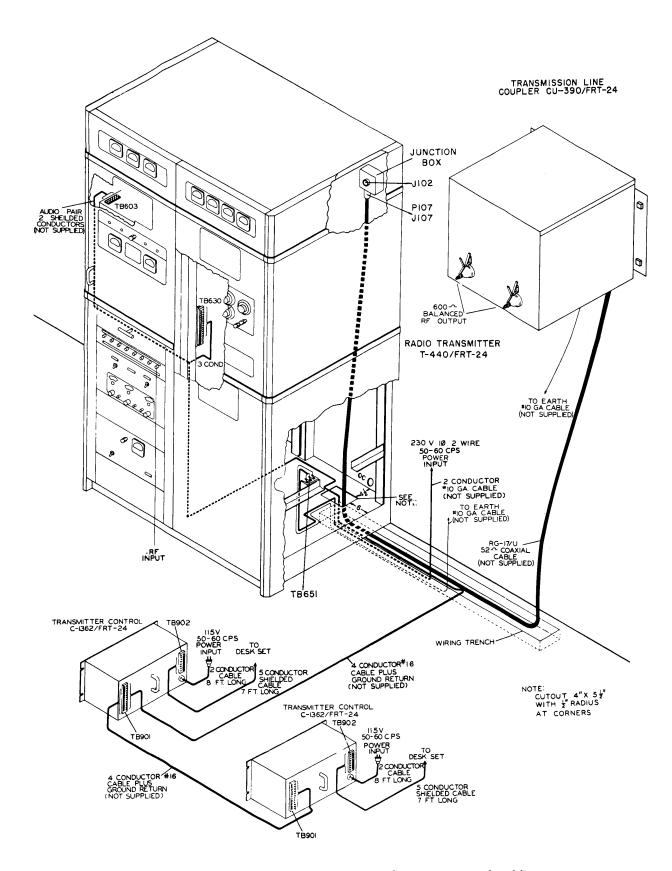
Radi Transmitter T-440/FRT-24, Ext rnal Cabling
